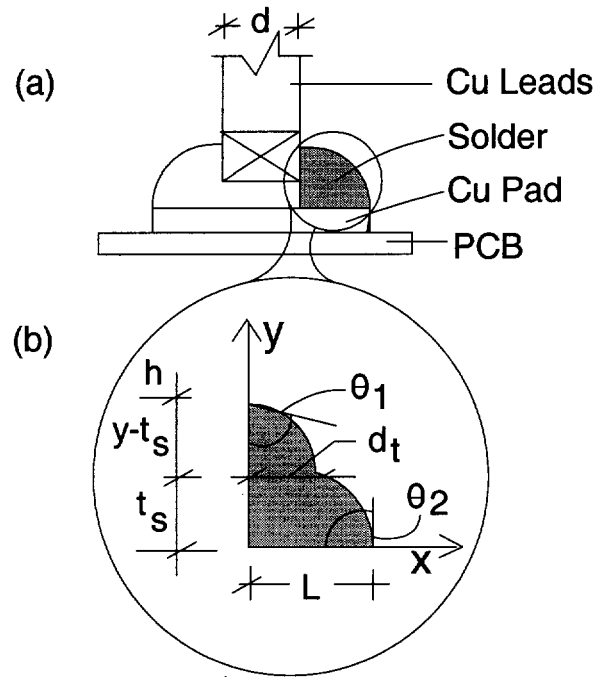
Cross Section of Gullwing Leadframe Solder Joint Geometry (a) Arbitrary Solder Shape (b) an enlarged solder fillet described by the governing equation
